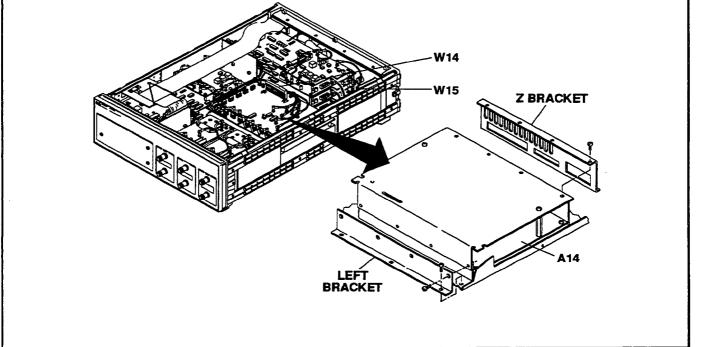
A14 Power Supply Assembly Remove and Replace
